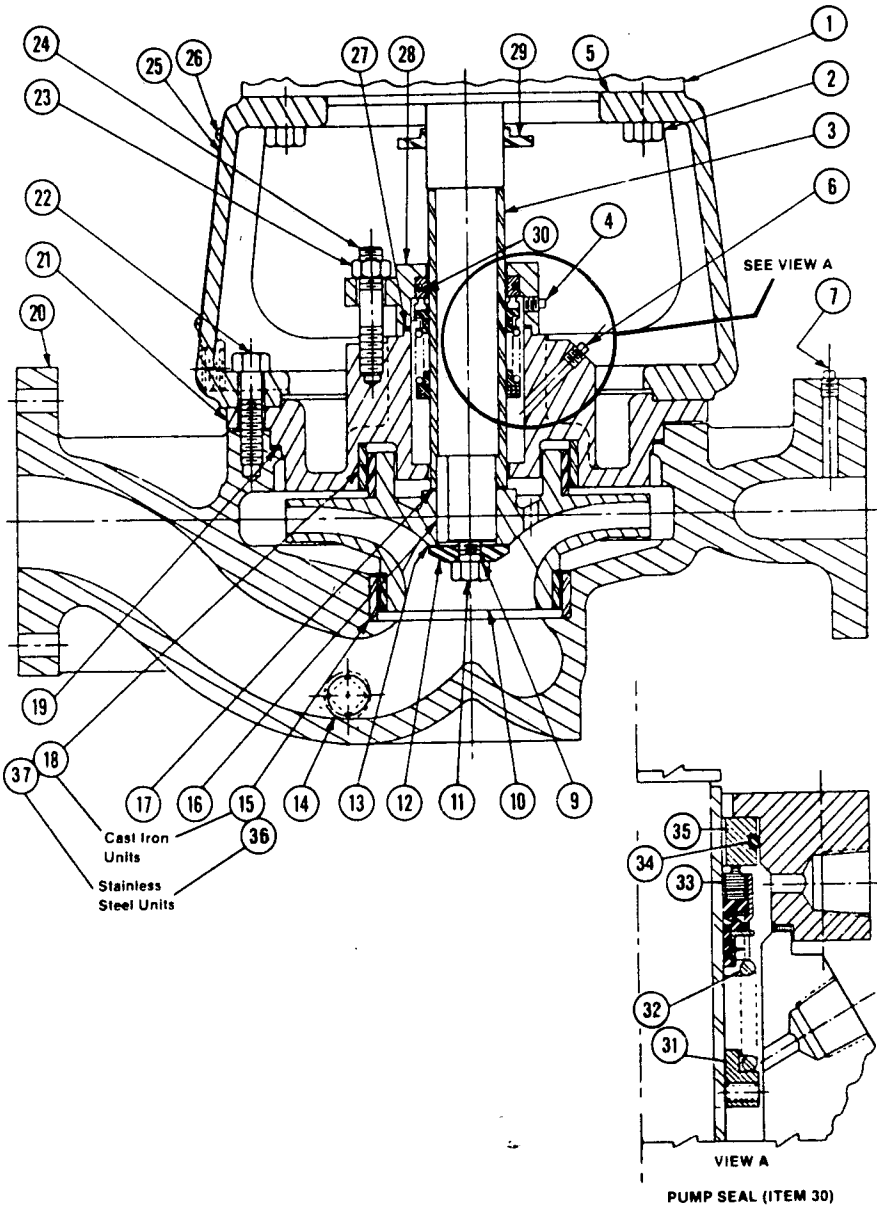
PUMP AND MOTOR ASSEMBLY.
